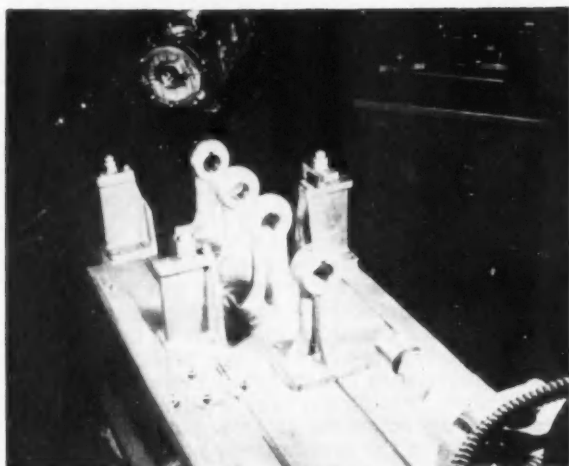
Fixture on Rockford drill for boring main bearing holes in assembled crankcase.
